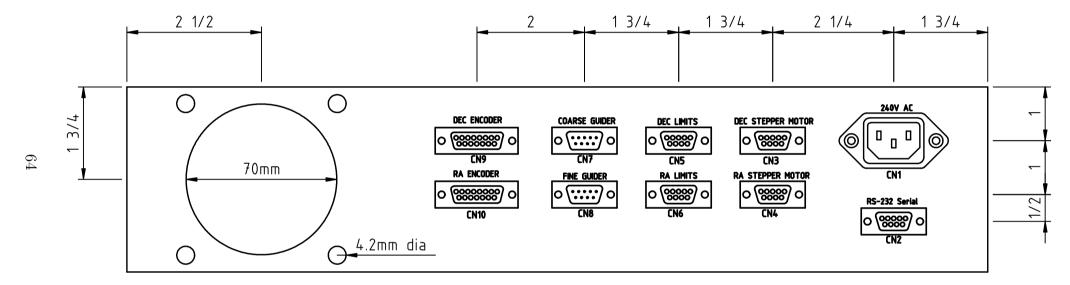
Mechanical drawing of the rear panel of the Mount Controller.
